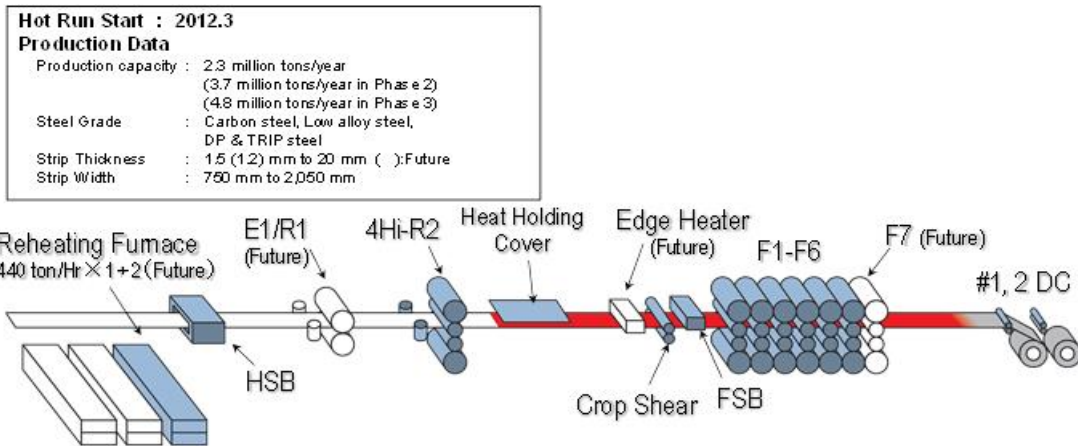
Layout of No.2 Hot Strip Mill in Usiminas Cubatao.
